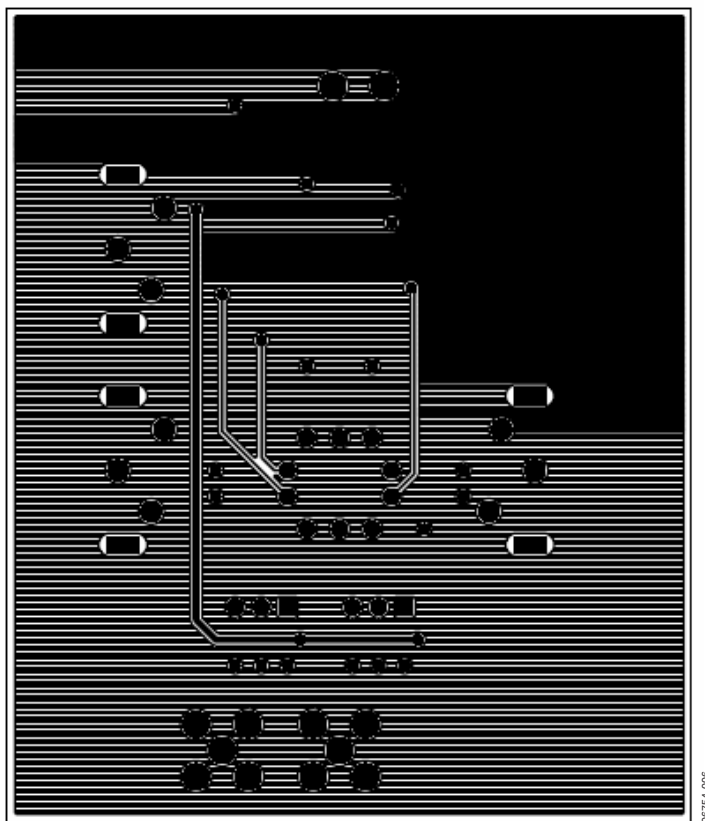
PCB Drawing Layer 2 (Bottom Layer)
